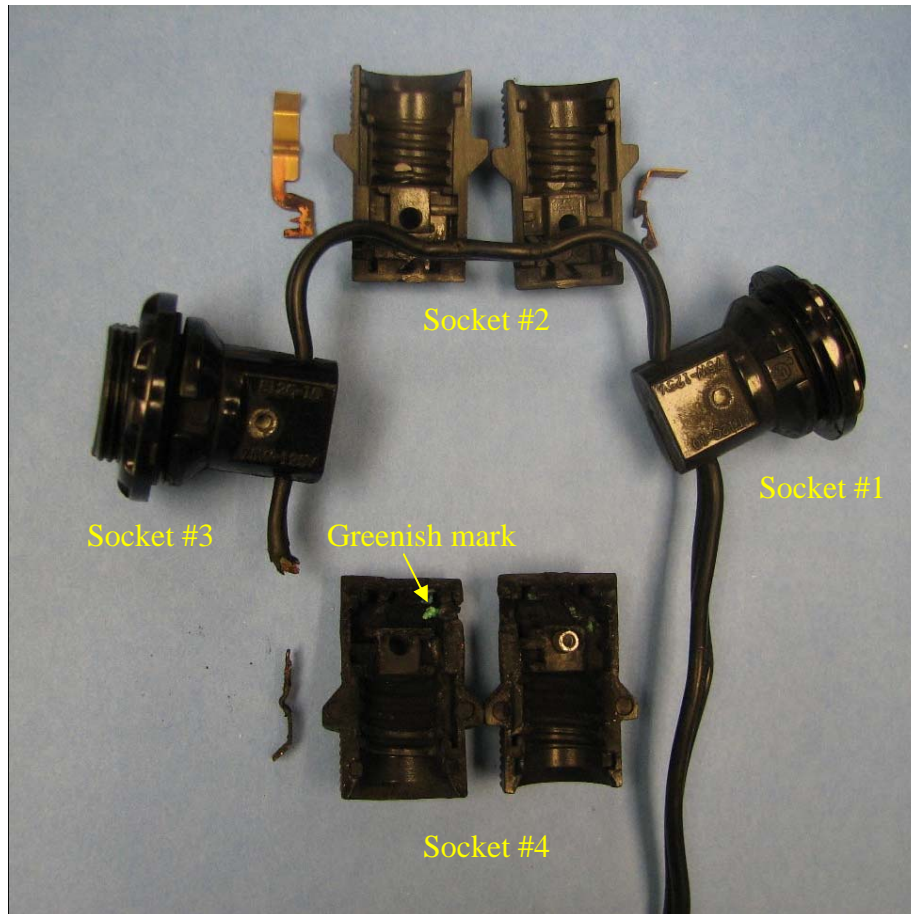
Four Sockets Removed from Fixture with Socket Nos. 2 and 4 Disassembled
